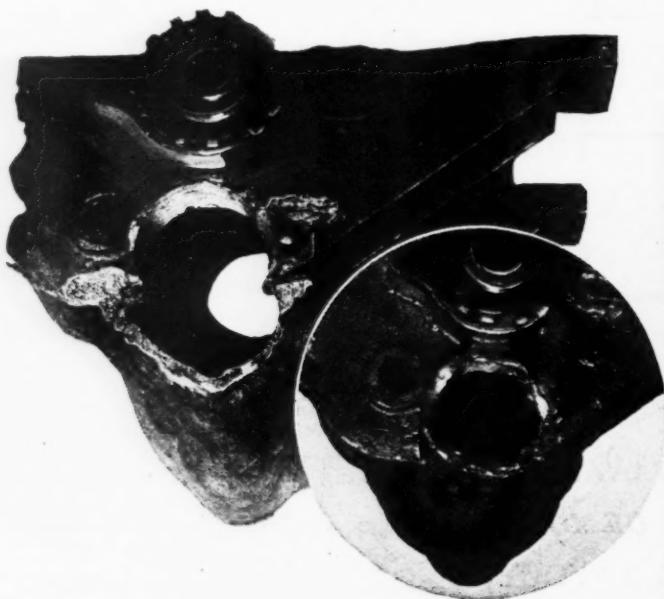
A badly broken gear case which could be repaired in no way except by welding. The broken parts are missing, necessitating building up with new material, as follows: 11 cu. ft. oxygen, 8.47 cu. ft. acetylene, 2, lb. filler and 3 hr. A new case would have cost about \$45
